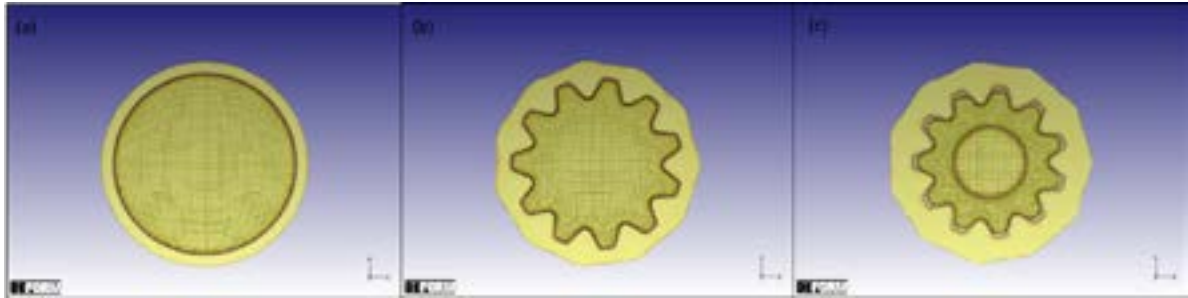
Deformed grid pattern flow line in the forged pinion head from top view: a) Actual forged head, b) Forged head with teeth, c) Forged head with teeth and punched hole.
